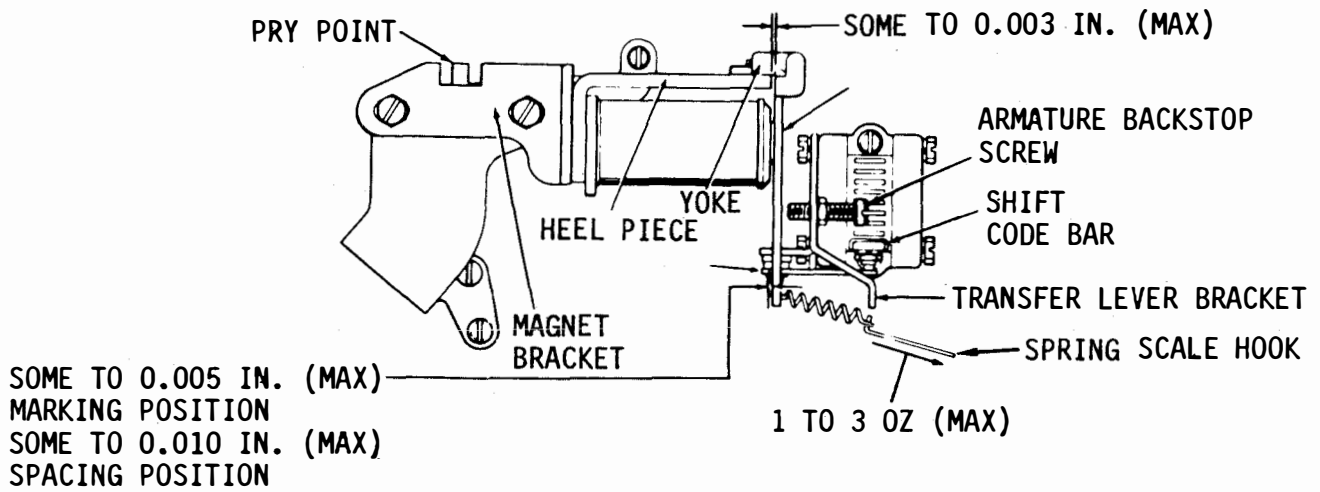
Shift Magnet Yoke, Shift Magnet Armature, and Shift Magnet Armature Return Spring, Left Side View
